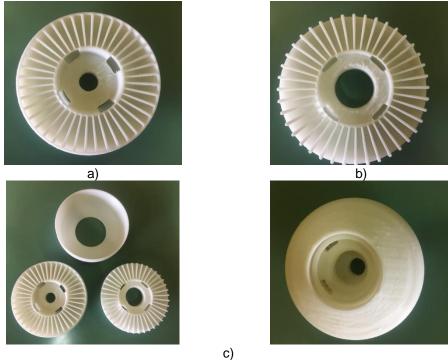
3D printing of hydrodynamic coupling a) pump wheel, b) turbine wheel and c) assembly.
